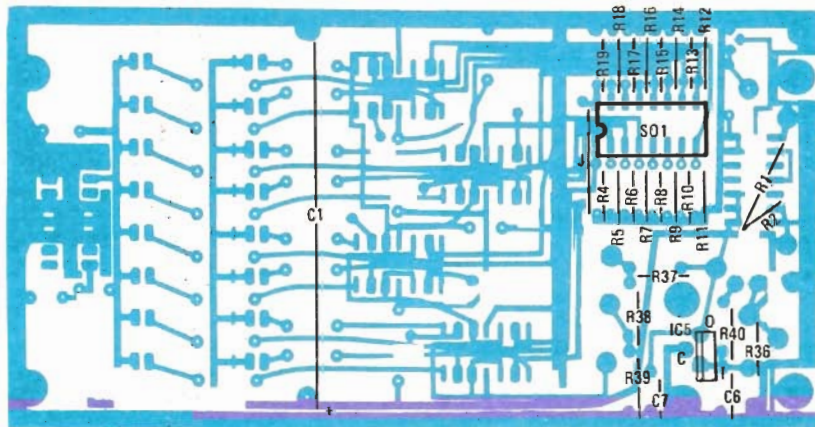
PARTS PLACEMENT ON "foil-side" of display board. Resistor R2 (at right) is soldered to pads on opposite sides of board.
